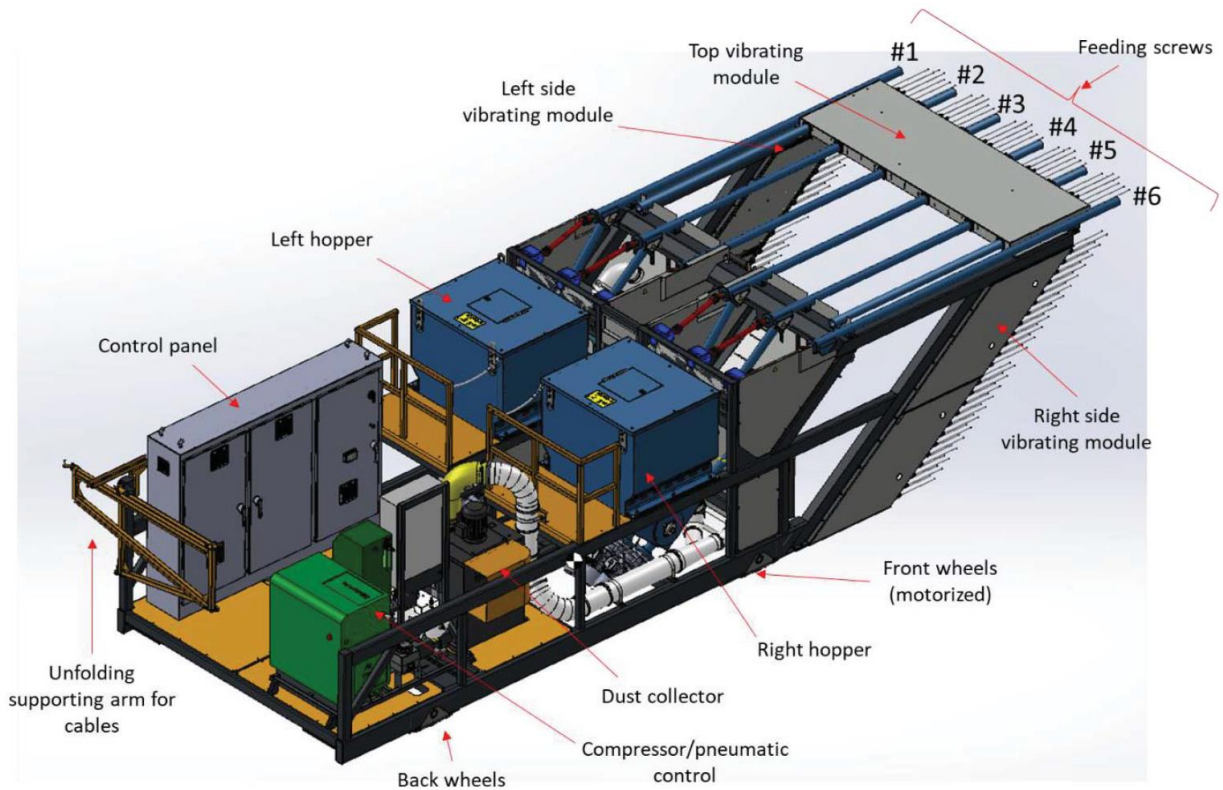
Gap Fill Delivery Equipment Layout
